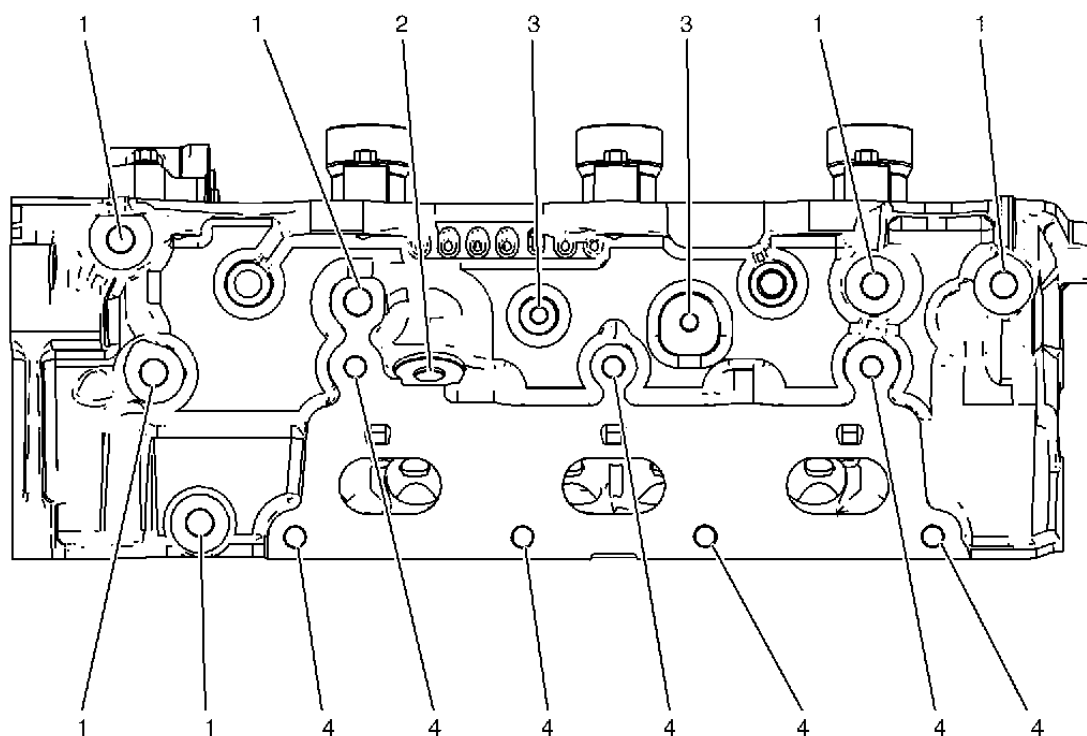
Identifying Left Cylinder Head Intake Face
